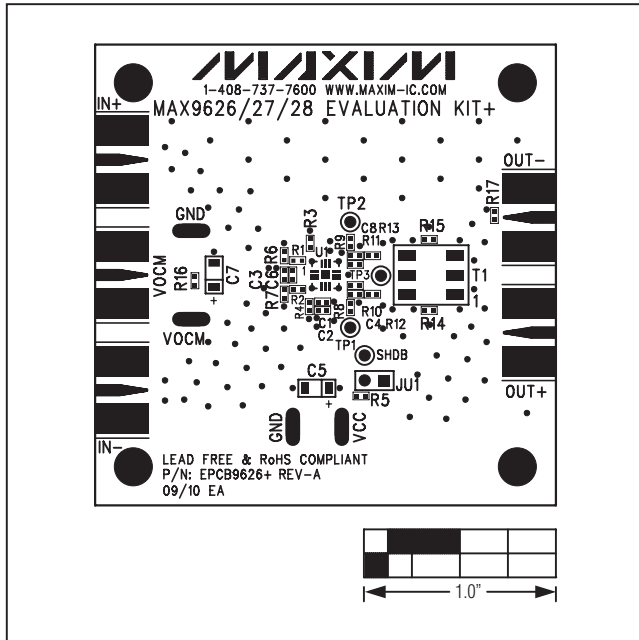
MAX9626 EV Kit Component Placement Guide—Component Side
